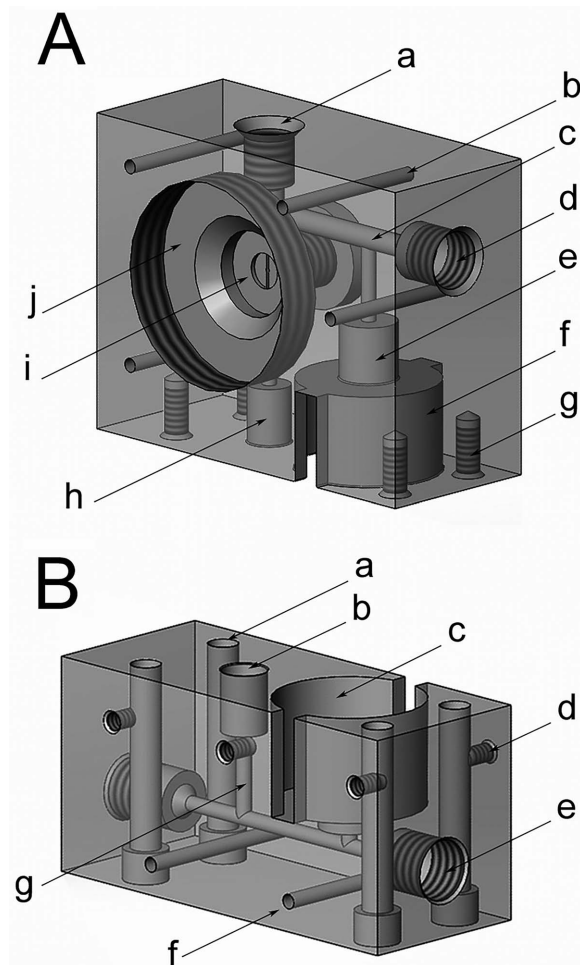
The 'transparent' drawing of the HPEC. Part A shows the upper section and B the lower part. Part A includes: (a) pressure port; (b) hole for insertion of cartridge heater element (or for cooling liquid); (c) portion of the closed-circuit channel; (d) access port; (e) well for connecting (large) hollow cylinder; (f) well for (electromagnetic pump) solenoid; (g) threaded assembly-bolt hole; (h) well for connecting (small) hollow cylinder; (i) well for exit window and PEEK-compression seal; and (j) well for a cone-shaped nut to compress the exit window assembly (see Figure 3). Part B includes: (a) assembly-bolt hole, see A(g); (b) well for connecting (small) hollow cylinder, see A(h); (c) well for (electromagnetic pump) solenoid, see A(f); (d) mounting hole for cooling plate, (e) access port; (f) hole for insertion of cartridge heater element (or for cooling liquid); and (g) portion of the closed-circuit channel.
